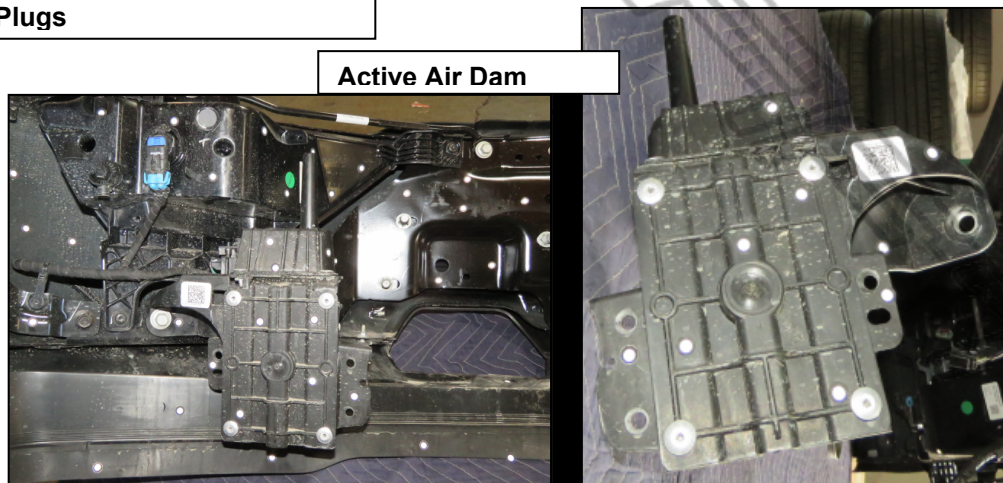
Driver/left side of Bumper attached to Bracket (pictured from
